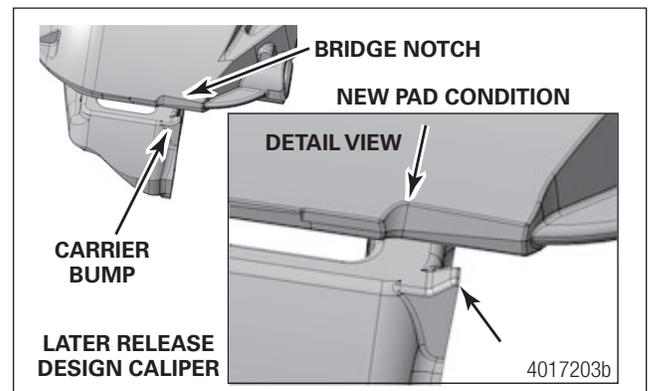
New Pad Condition on Later Release Design Caliper
